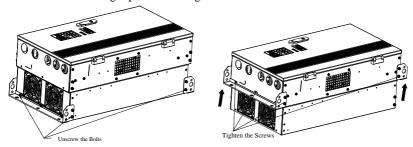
Disassembling the FlangesFigure 2-7 Assembling the Flanges
